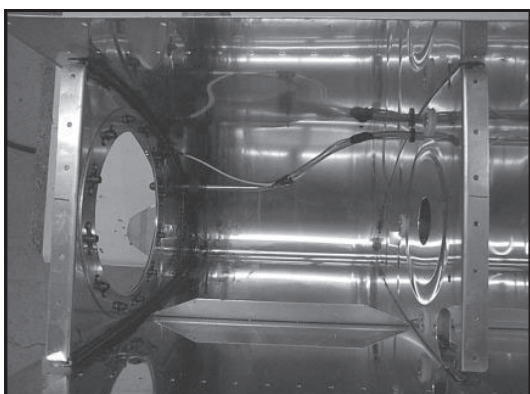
An interior fuel tank rib, riveted and sealed.
